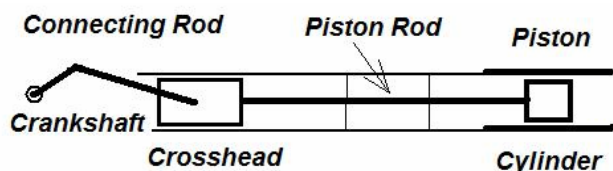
Schematic diagram of mechanism of special purpose heavy duty reciprocating machine.
